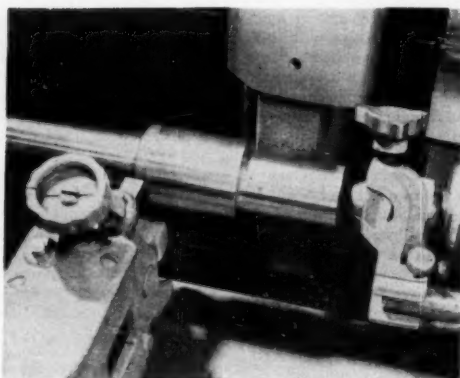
SETUP FOR CORNER-WEAR TEST FOR GRINDING FLUIDS (A crankpin grinding wheel and a forged crankshaft steel workpiece are shown.)
